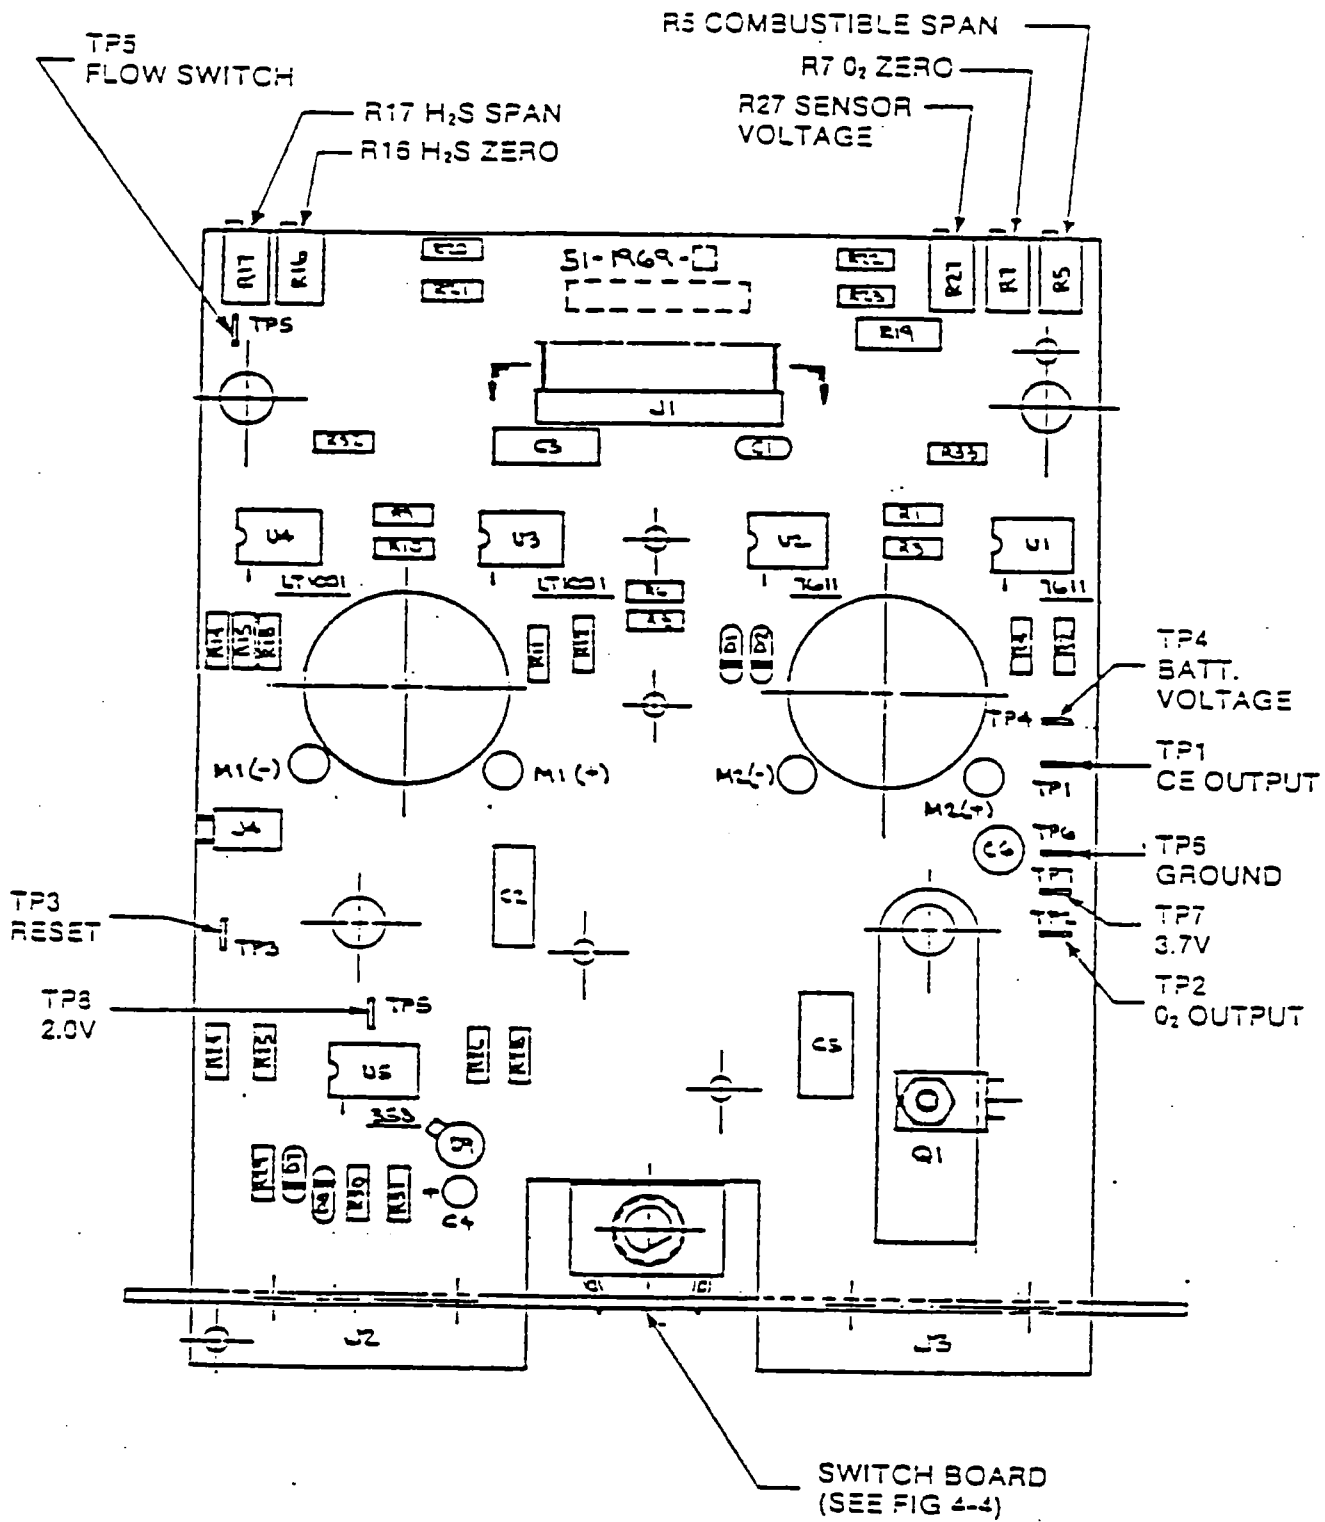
Main PC Board Test Point and Potentiometer Layout
